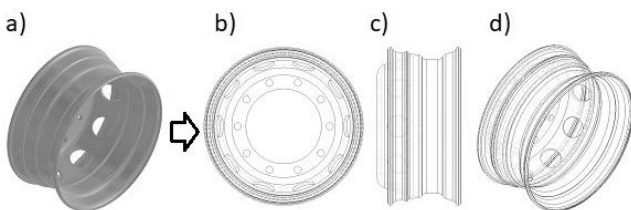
The single rim utilized in the twin rear wheels of the rear axis of the tipper: a) general view; b) and c) wireframe style perpendicular views; d) wireframe style isometric view
